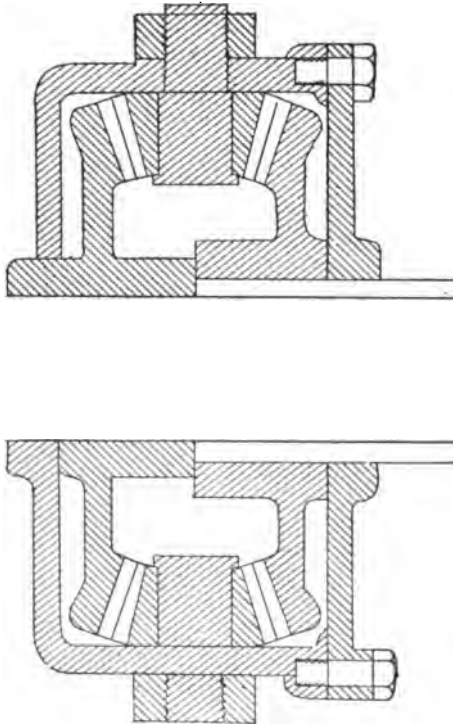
Section through the axis of a bevel gear differential train, showing two bevel pinions attached at top and bottom of the sprocket drum, and two bevel gear wheels one on the through axle shaft, the other on a rotating sleeve.
